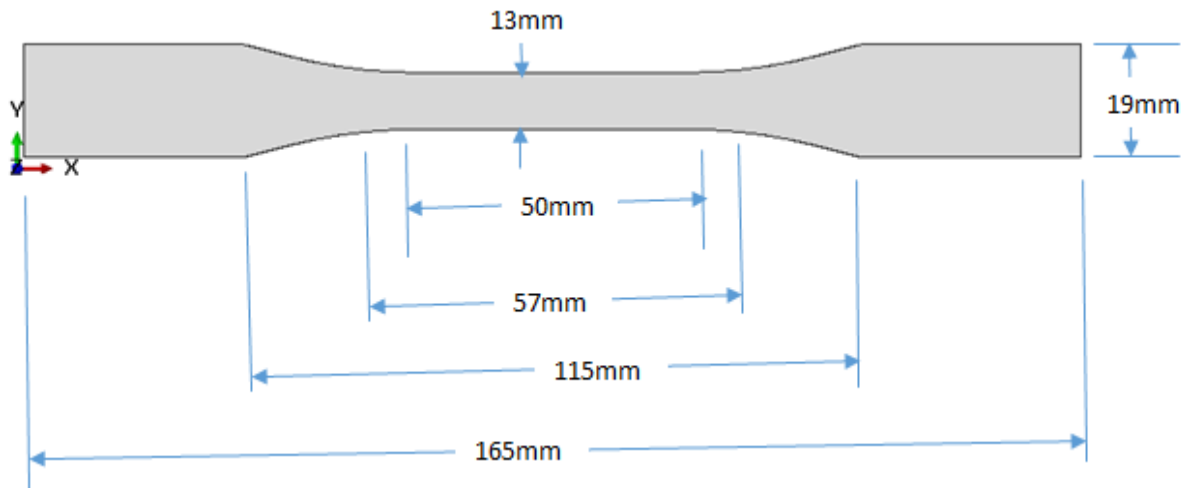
Tensile Specimen dimension as per standards ASTM D 638 type-I
